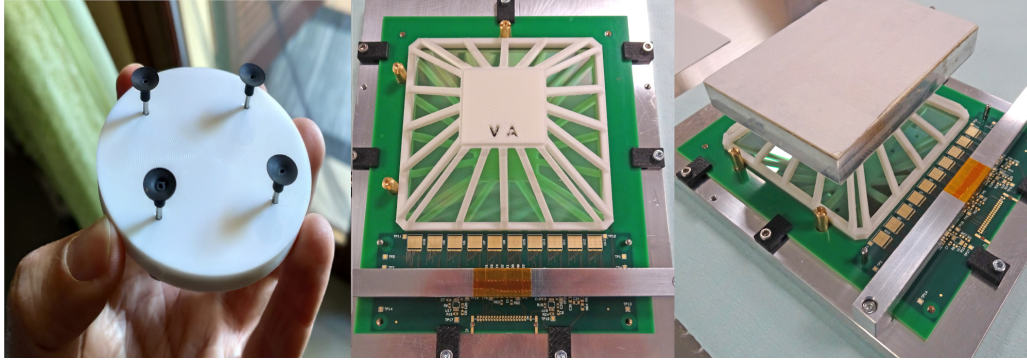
Custom tools for assembly: pickup tool with 4 suction cups (left); tool to distribute pressure for sensor gluing on hybrid board (center and right pictures).
